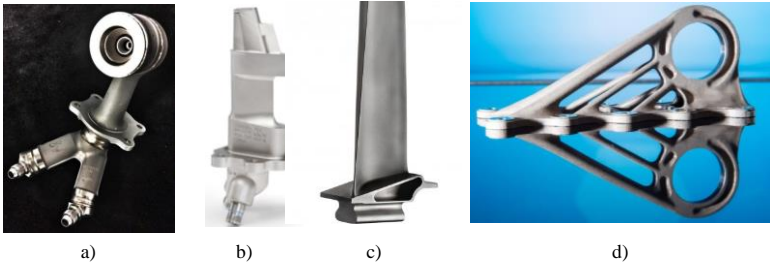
Success cases of AM components, a) CFM International’s 3D-printed fuel nozzle, b) housing for the sensor T25 (one of the first 3D-printed engine components approved by FAA ready to fly inside commercial jet engines such as GE9X and Boeing 777s), c) Titanium Aluminide Low-Pressure Turbine blade, and d) Airbus’s A350 bracket [8].
